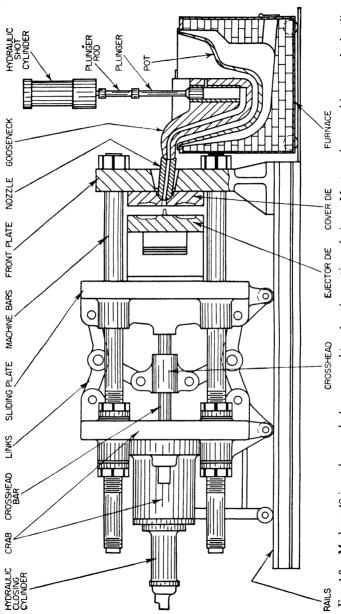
Modern 48-in. submerged-plunger machine for the casting of zinc. Most modern machines are hydraulically operated and are equipped with automatic eveling controls and safety devices, as is this model.
